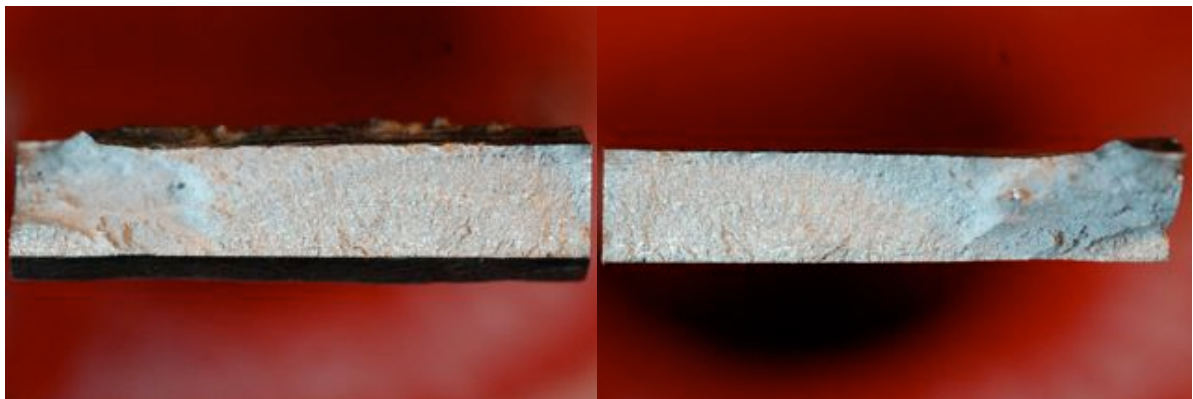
shows some of the fracture surfaces of “intact” LB welded 6082-T6 specimens.
